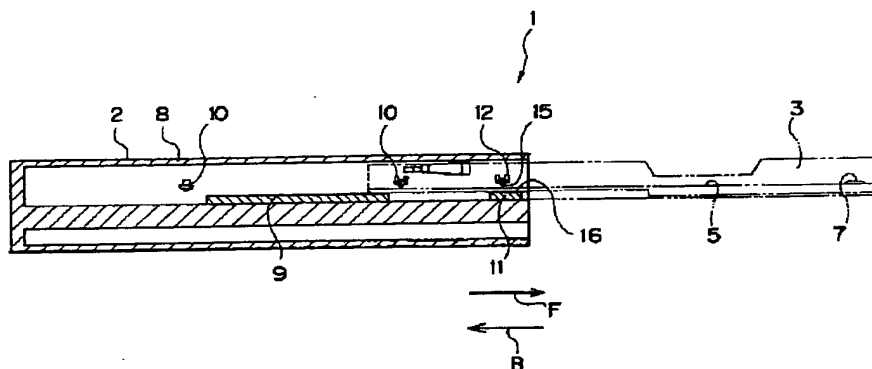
is a cross-sectional view of a mechanical assembly 1. It features a central shaft 9 with a sleeve 8 mounted on it. The sleeve 8 has a flange 10 at its right end. A spring 12 is located between the flange 10 and a stop 15. A pin 11 is shown securing the assembly. Arrows indicate forces F and B acting on the components.
